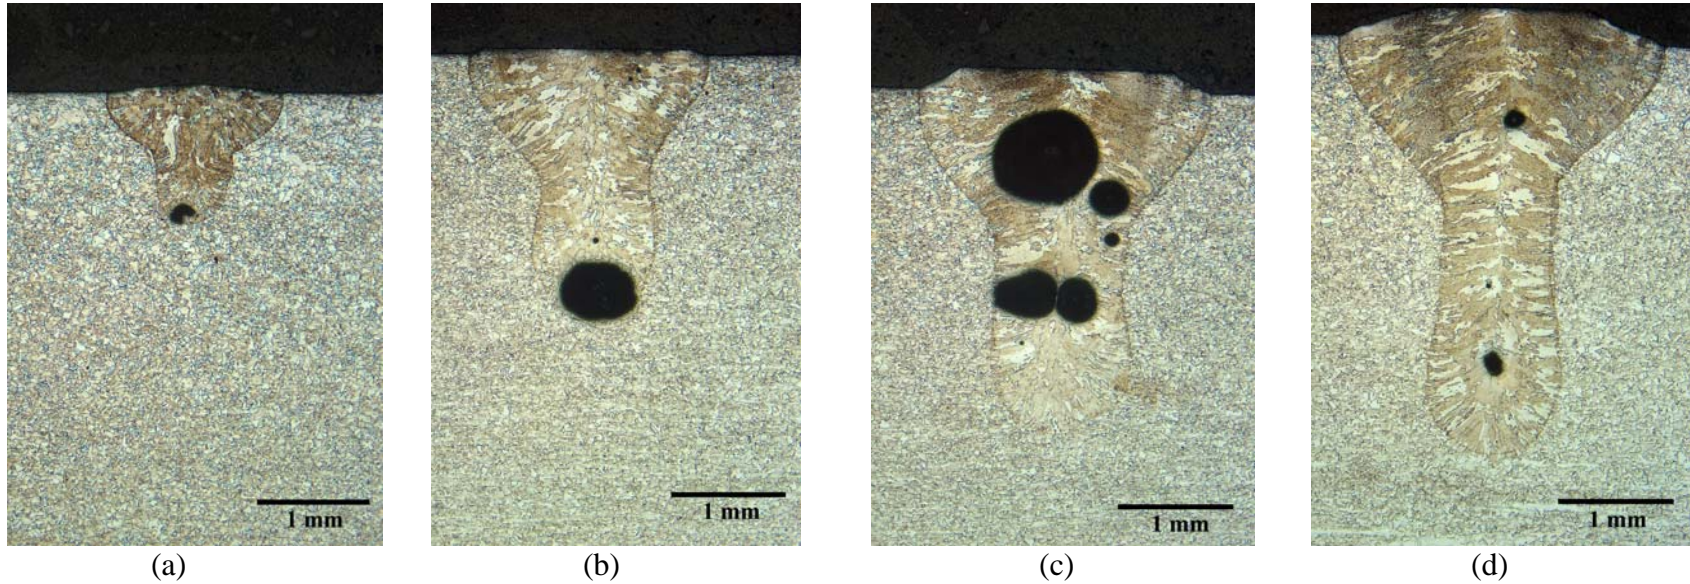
(a-d). Micrographs of weld cross sections for welds made in 304L stainless steel at machine power settings of (a) 500 W, (b) 1000 W, (c) 1500 W, and (d) 2000 W at a travel speed of 12.7 mm/sec. These welds have been made on the LLNL laser system.
